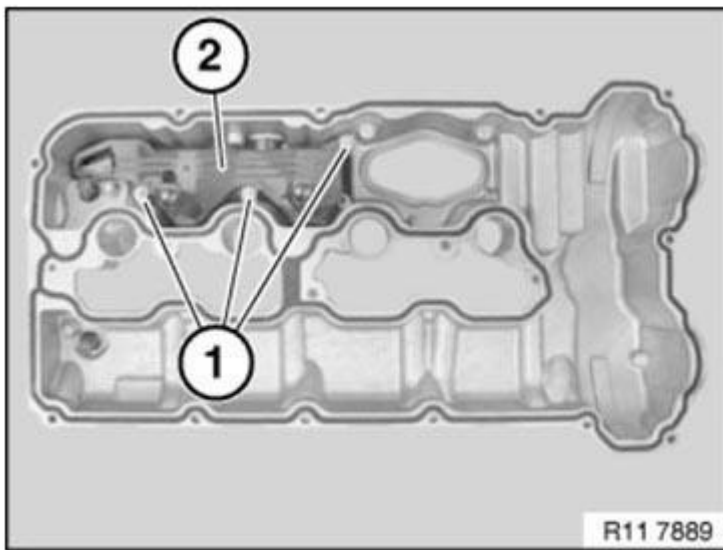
Identifying Profile Seal Of Cylinder Head Cover
